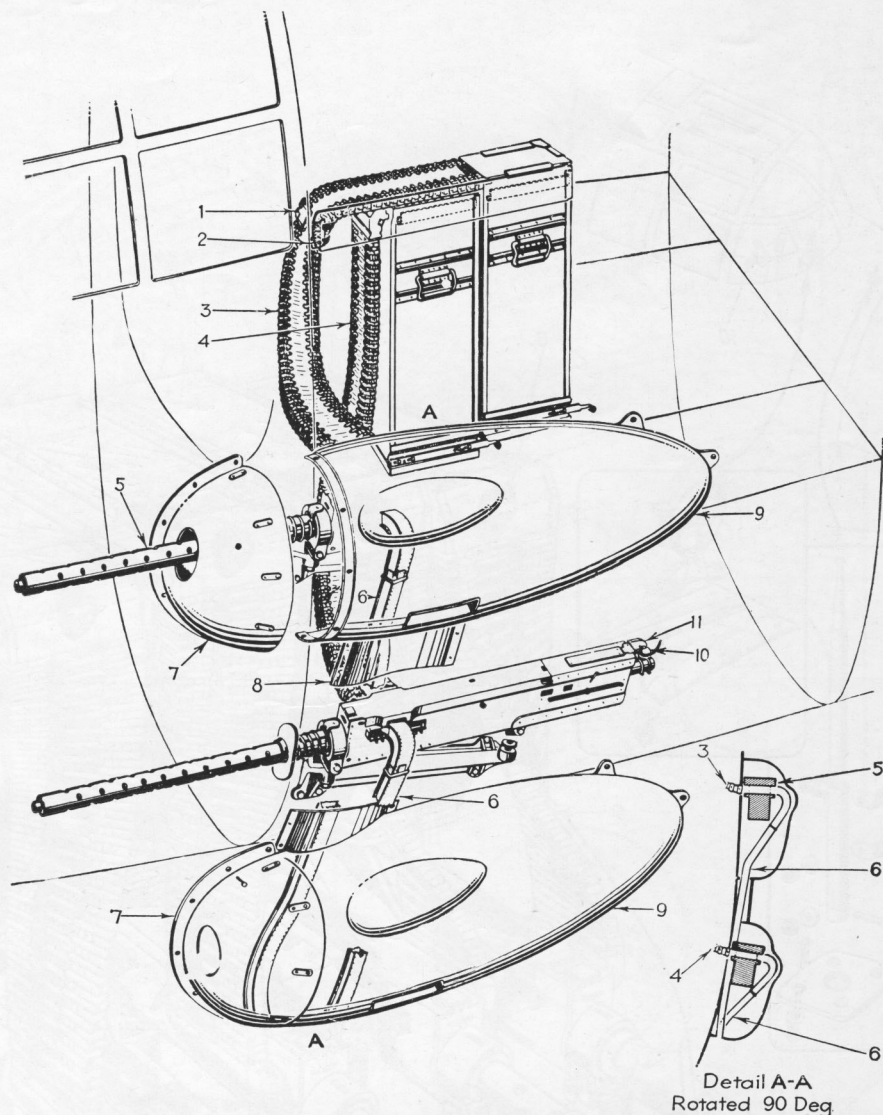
Fixed blister-gun installations (left and right side): (1) (2) cartridge feed chute retaining strap; (3) (4) feed chute; (5) .50-caliber machine gun; (6) link ejector chute; (7), (8), and (9) gun fairing assembly; (10) solenoid; (11) charger.
